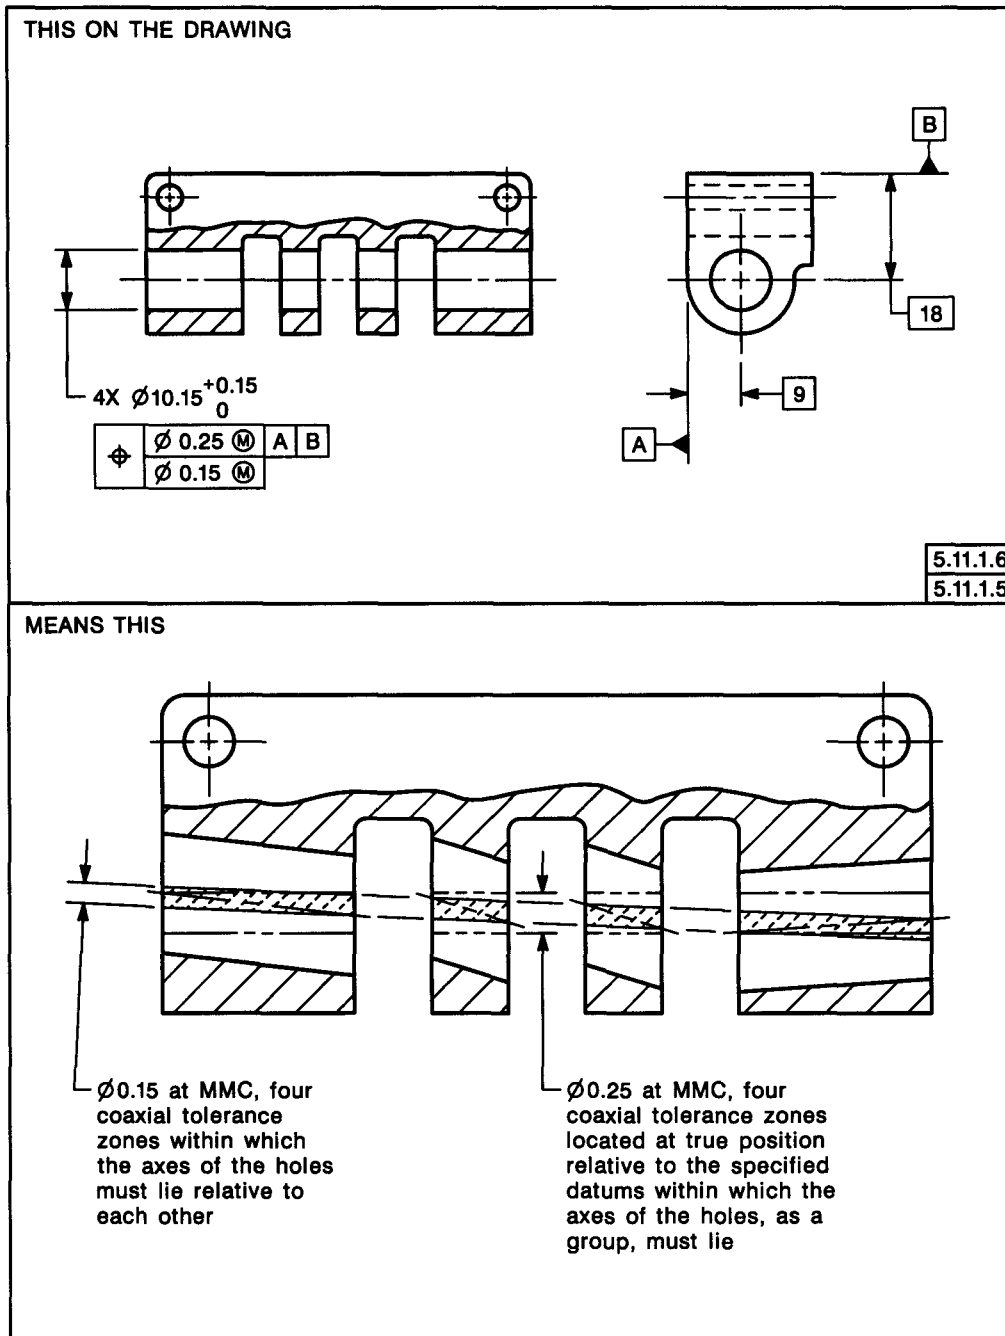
POSITIONAL TOLERANCING FOR COAXIAL HOLES OF SAME SIZE
